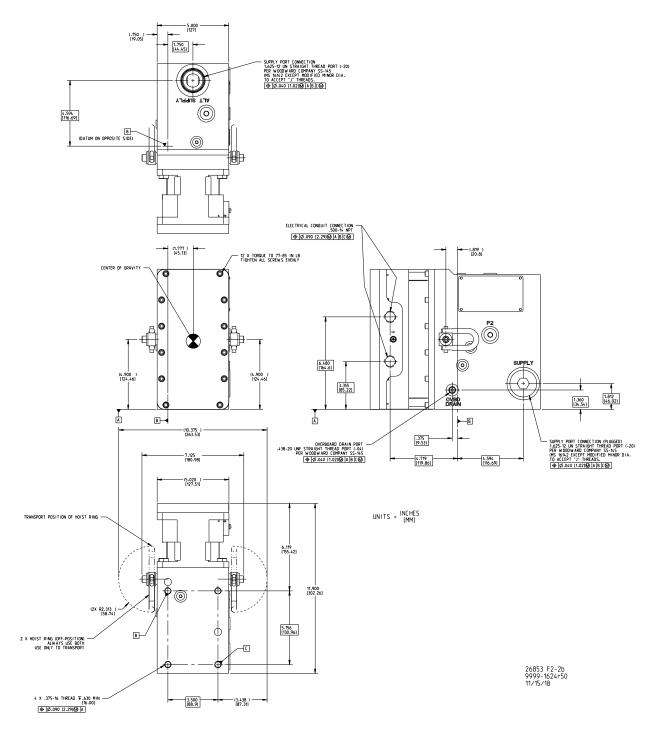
Outline Drawing LSOV25, Stainless Steel, 24 VDC, w/Single Proximity Switch
